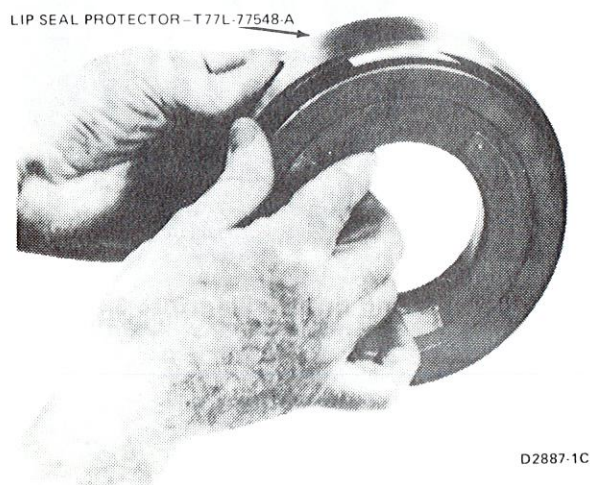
Installing Forward Clutch Piston and Lip Seal
